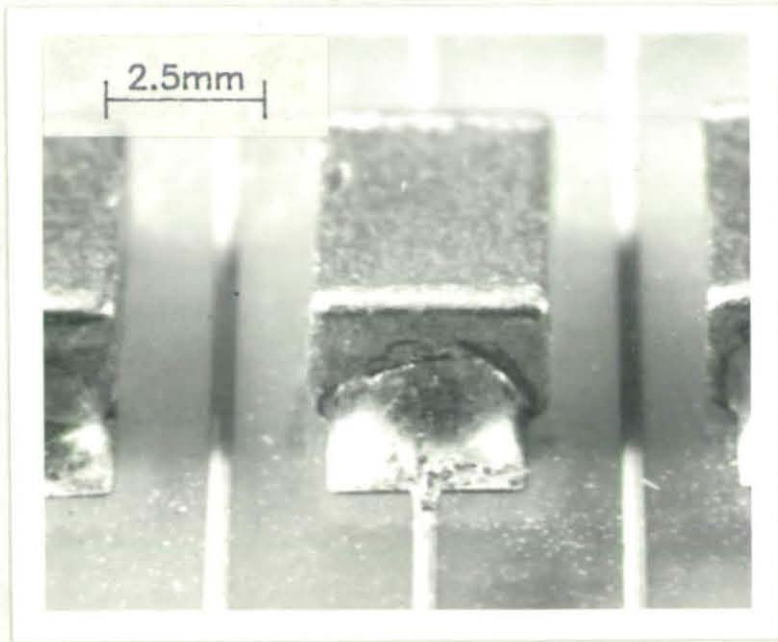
Solder Fillet Cracking in -55 to + 95°C Test on 1812
